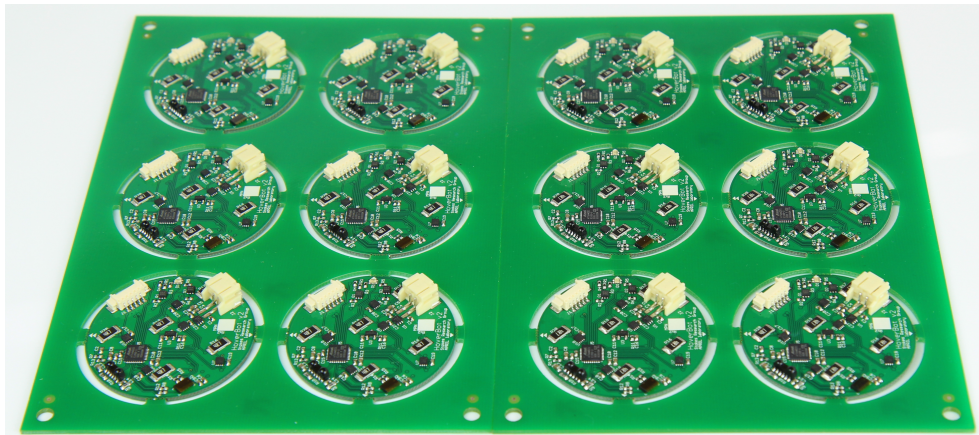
Assembled HoverBots version 2. These populated boards came directly from the PCB foundry.
